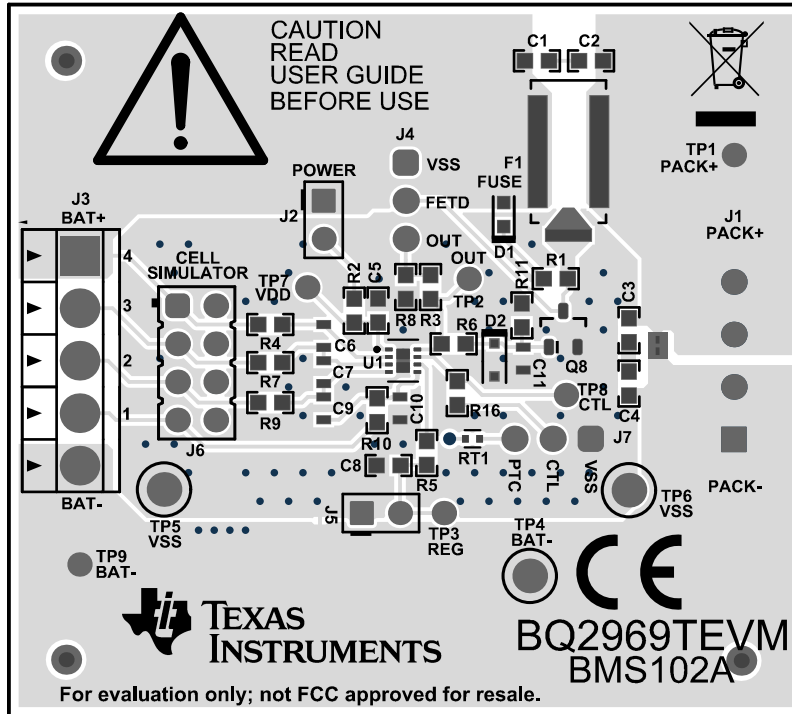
BQ2969T Two-Layer Board Layout - Top Layer
